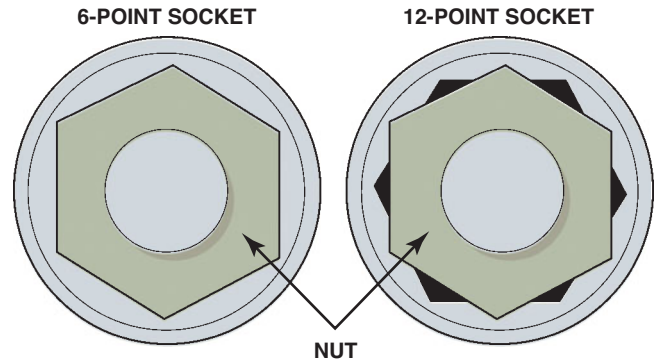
A 6-point socket fits the head of a bolt or nut on all sides. A 12-point socket can round off the head of a bolt or nut if great force is applied.
